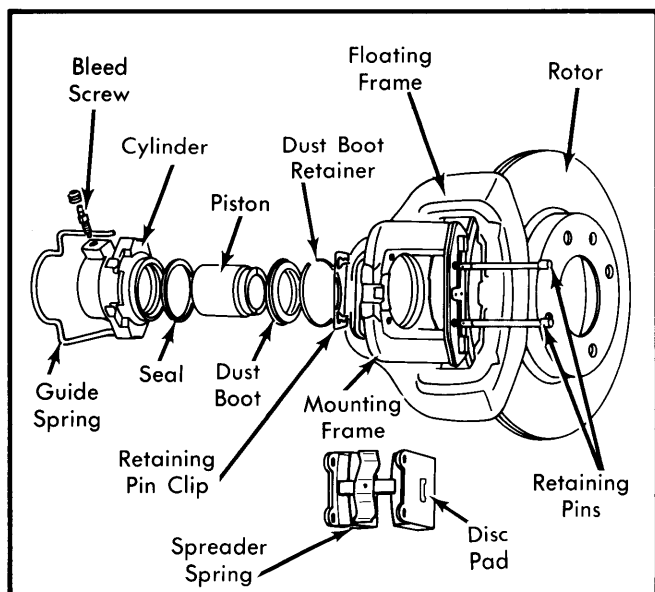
ATE Disc Brake Assembly — Except Vanagon
